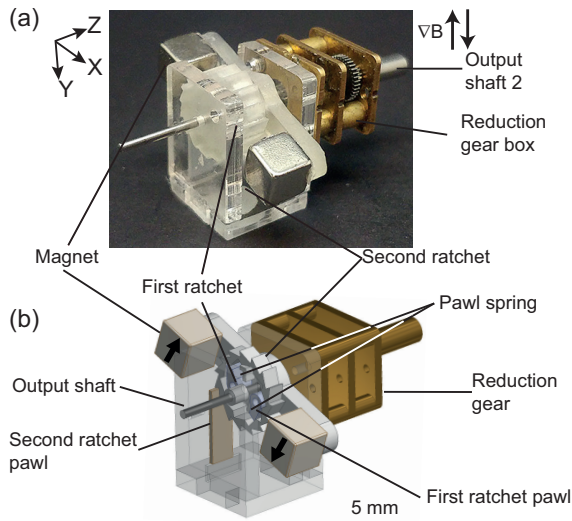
The developed magnetic force driven wireless motor showing the double ratchet mechanism. (a) Photograph and (b) CAD section view.
